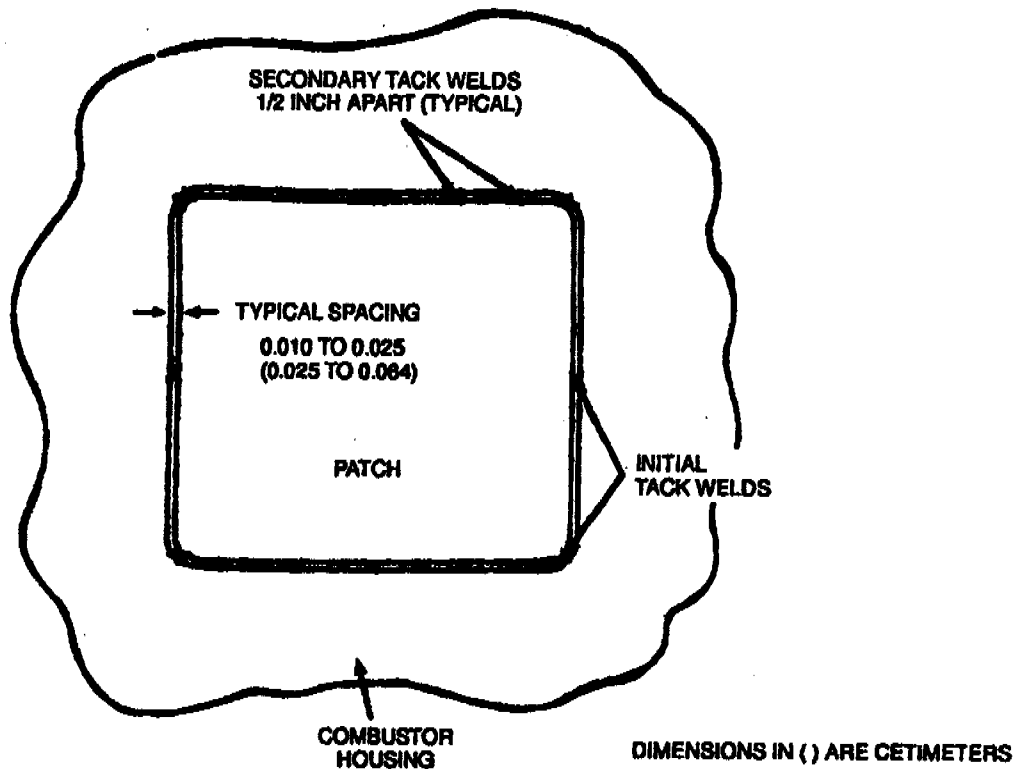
Typical Tack Weld Sequence and Location.
